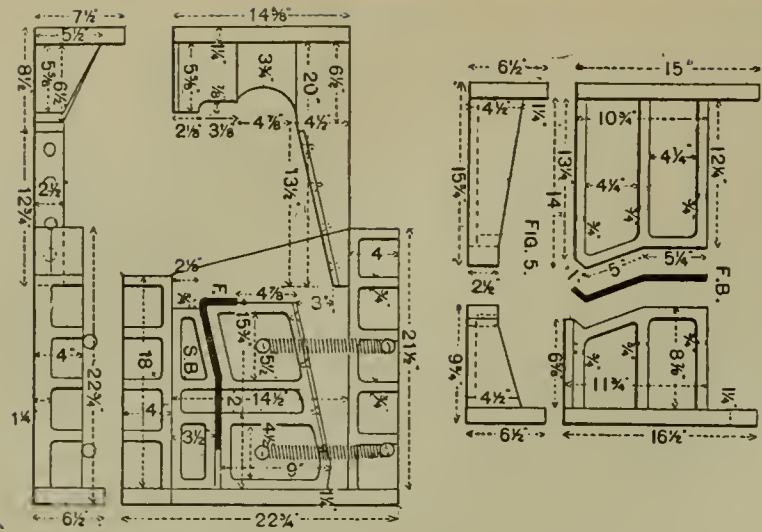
FORMS USED WITH BULLDOZING MACHINE.
